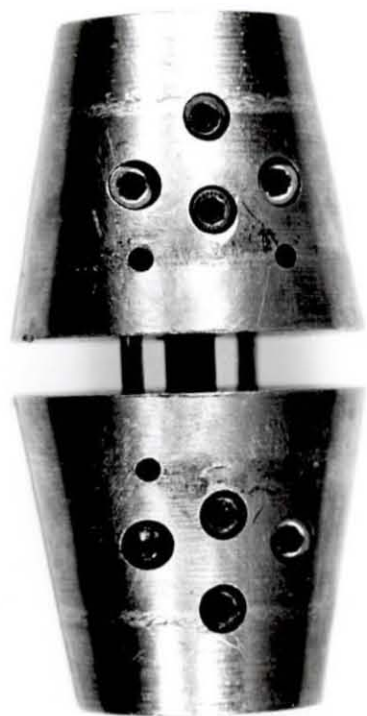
Partial Edge Supported Anti-Buckling Guide (ABG-2)
